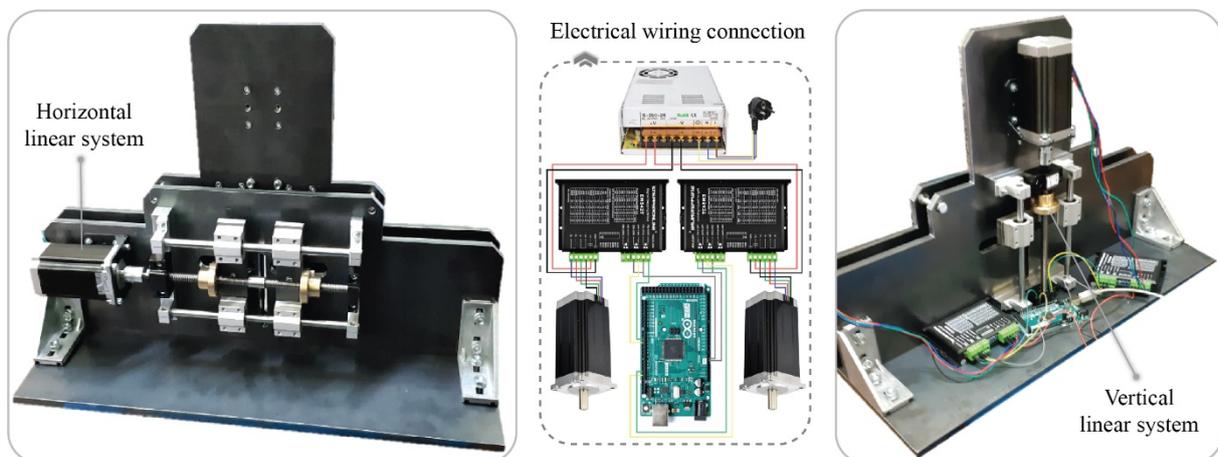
Developed prototype of the flexible tooling system for sheet metal bending
